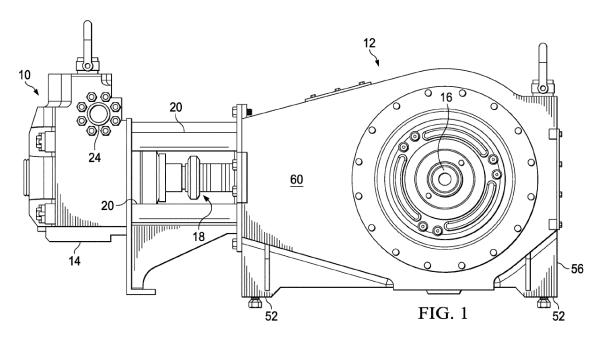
is a side elevation view of a reciprocating pump assembly 10 having fluid end 14 and power end 12 that is driven by a crankshaft 16. *Id.* at 3:11–12, 4:61–67. Power end 12 can be mounted to skid 500 as shown in Figure 56, reproduced below.
